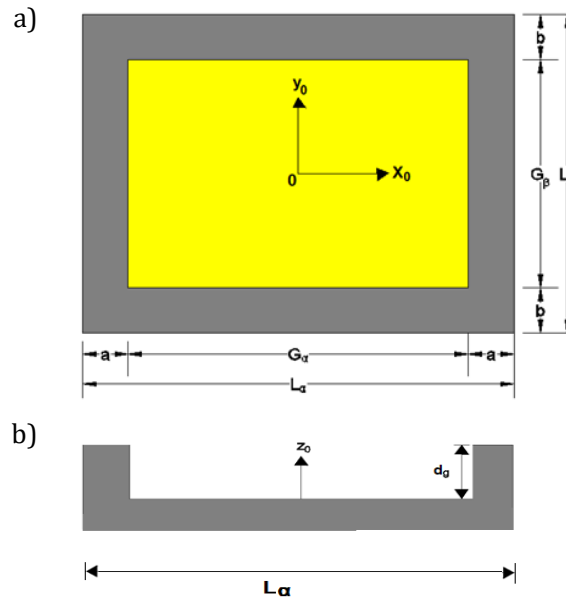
(a) Top View (b) Front view of rectangular macro-groove on bearing surface.
